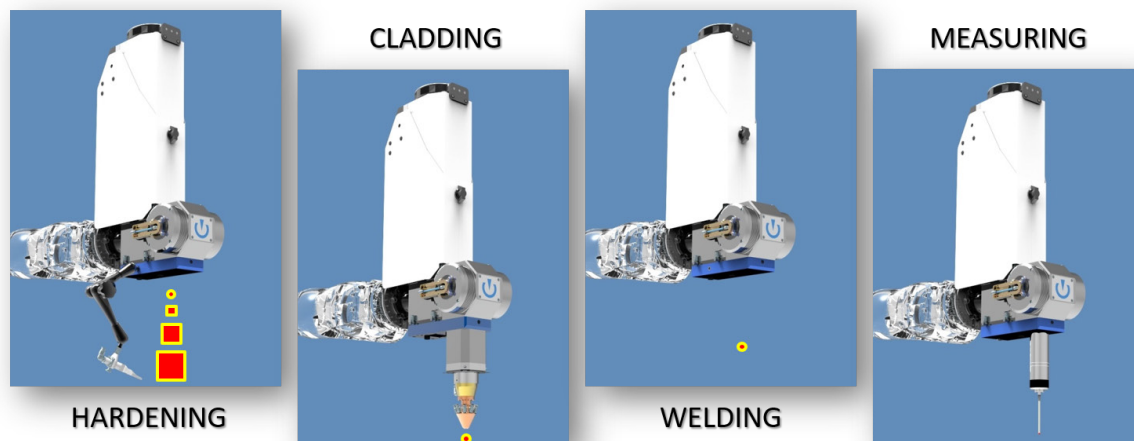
The new processing head is capable of four different technologies, respectively laser hardening, cladding, deep penetration welding and tactile measuring.
